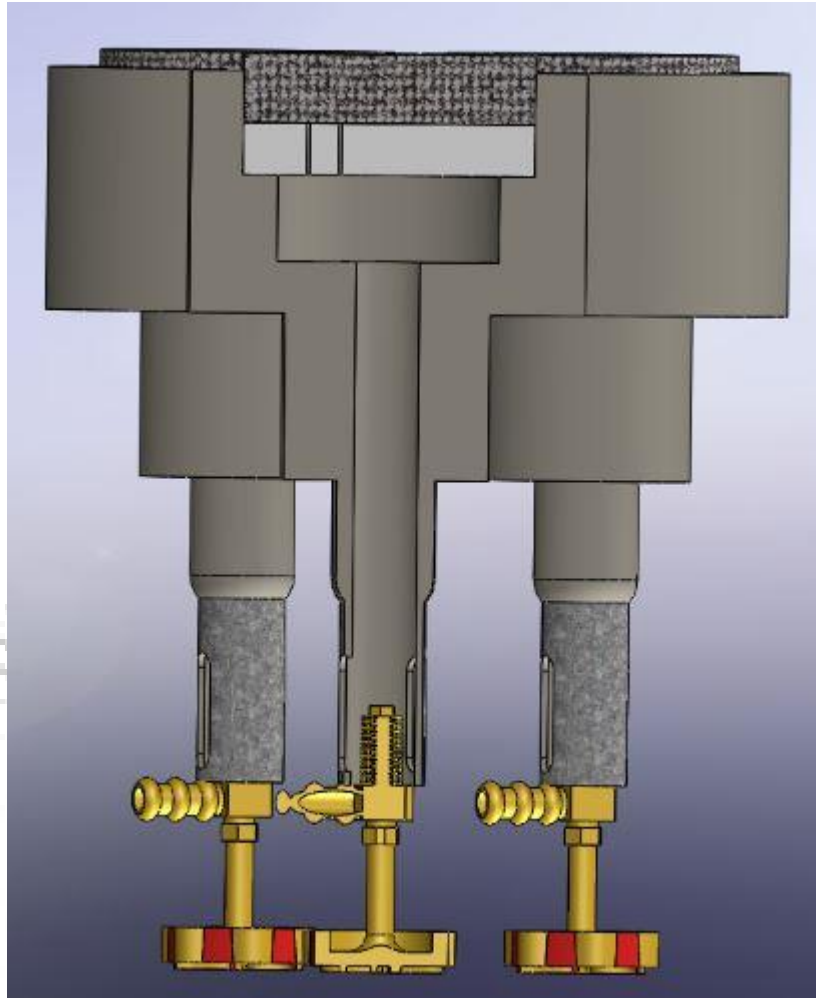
Assembly of jet pin nozzle and mixing tube
